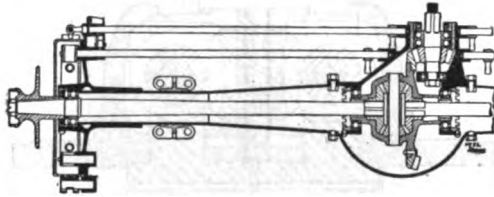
One side of typical rear axle, with brake drum (on the wheel) and brake-operating bars.
